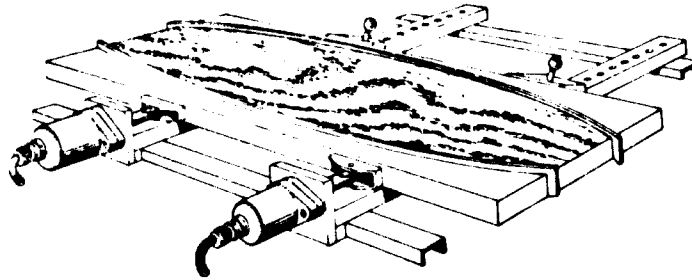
Edge lipping press. The width and the shape is roughly fixed by two adjustable fixed stops, clamping is by the two pneumatic cylinders which can be sliding freely over the whole length of the rails.
